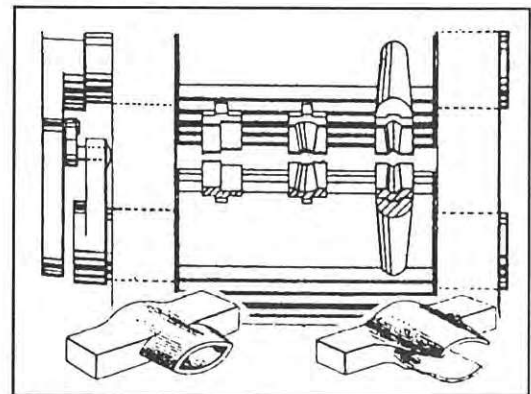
Patent illustrations of part of Bealor's pickhead machine and the stages that created the definitive handle flange. After the machine punched out the handle socket, the excess iron was drawn out in two halves, and the machine forge-welded them together. (Pat. 204,417)
